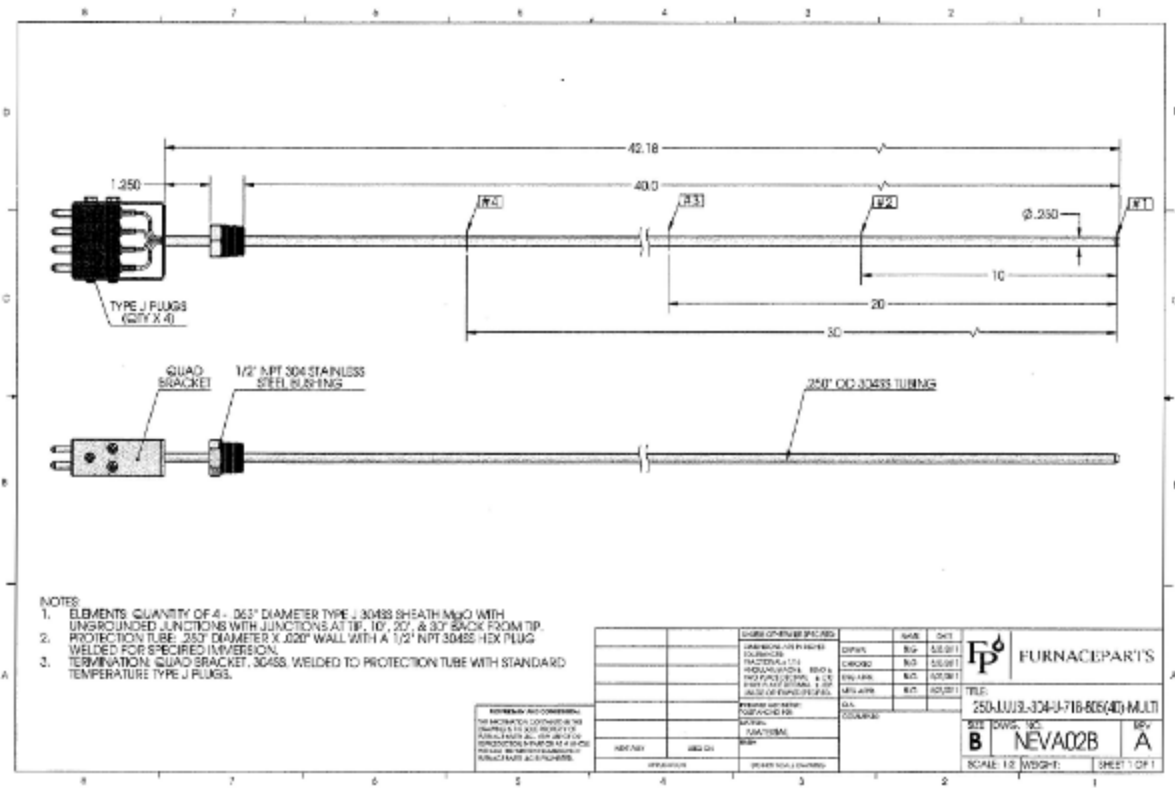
Manufacturer drawing of the multi-measurement thermocouples.
